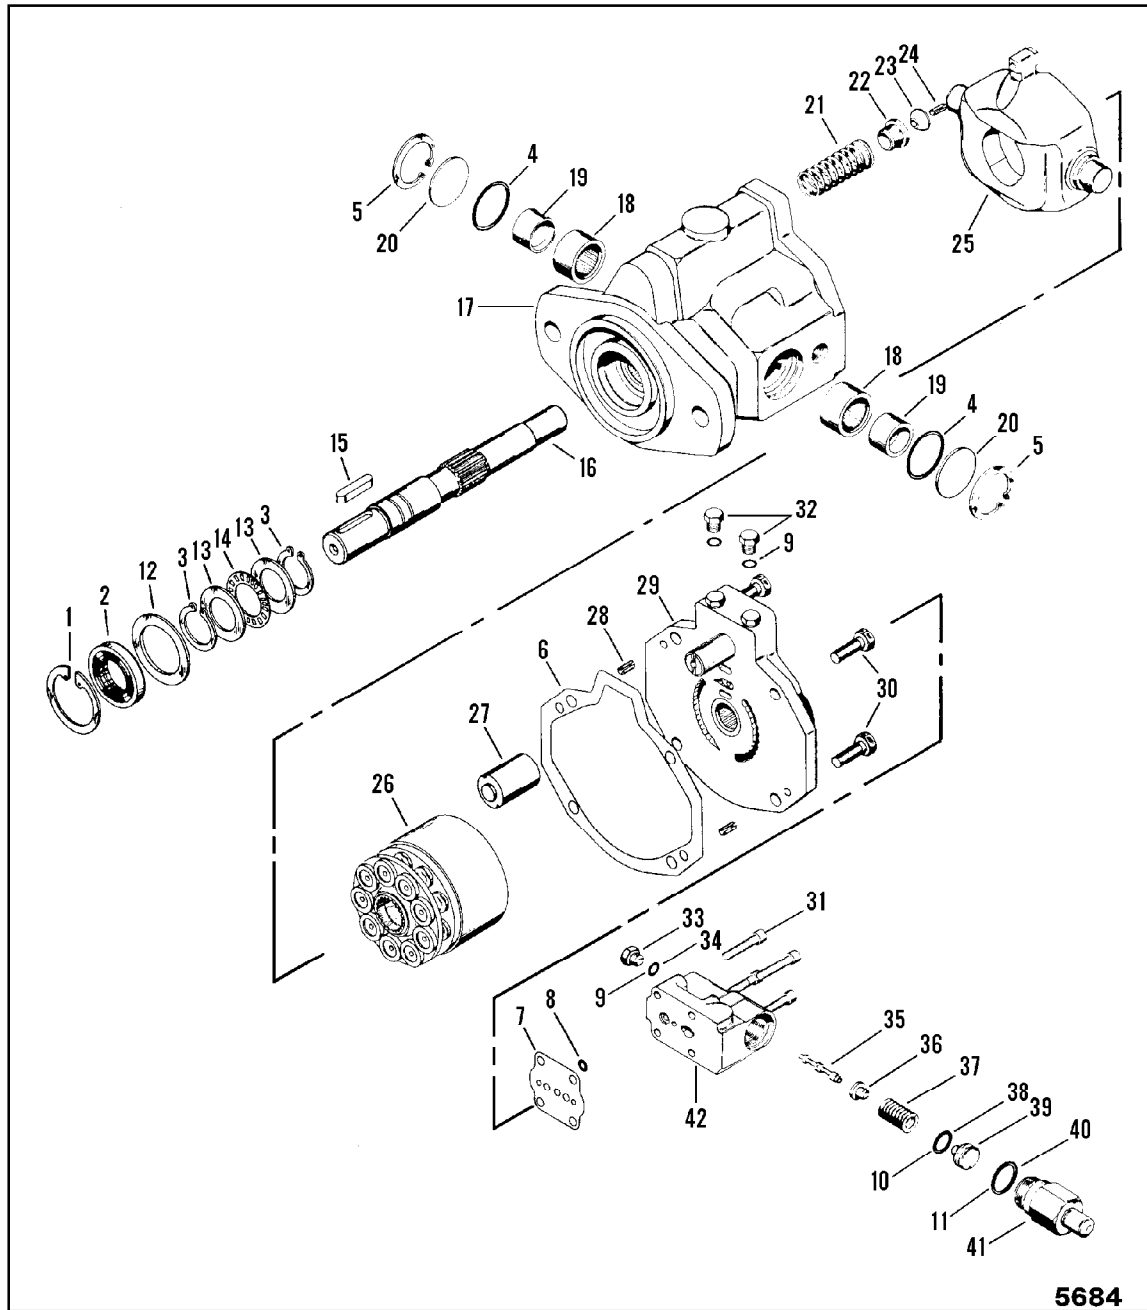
EXPLODED VIEW OF STEERING & BRAKE PUMP
